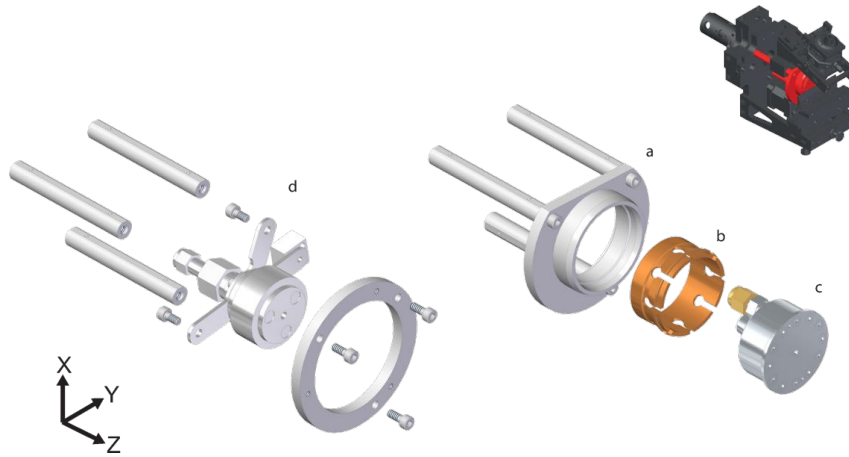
Supersonic expansion valve assembly. A piezo valve (c) is held by a bronze clamping ring (b) in a holder with three rods (a). Alternatively, an Even-Lavie valve (d) can be mounted onto the same three rods.
